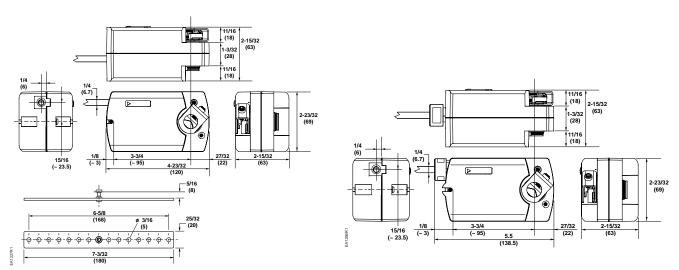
GQD Actuator and Mounting Bracket Dimensions in Inches (Millimeters).
